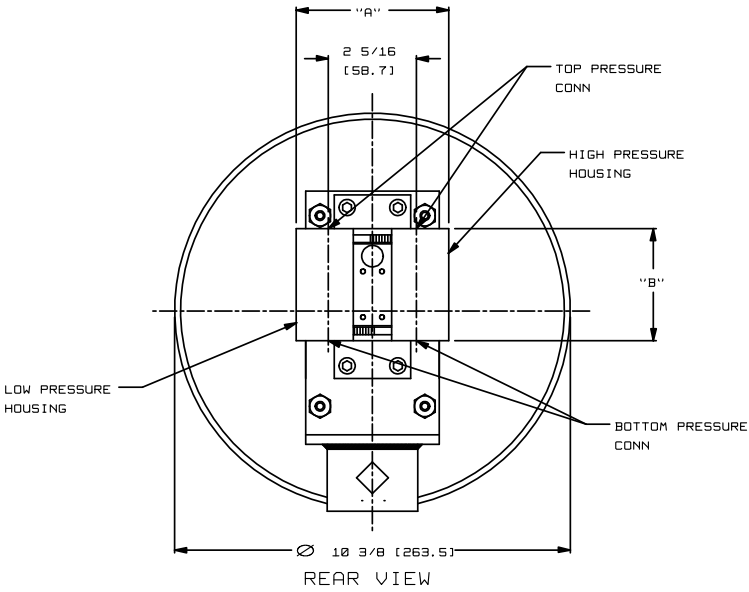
290D OD Drawing (Part 1 of 2)
